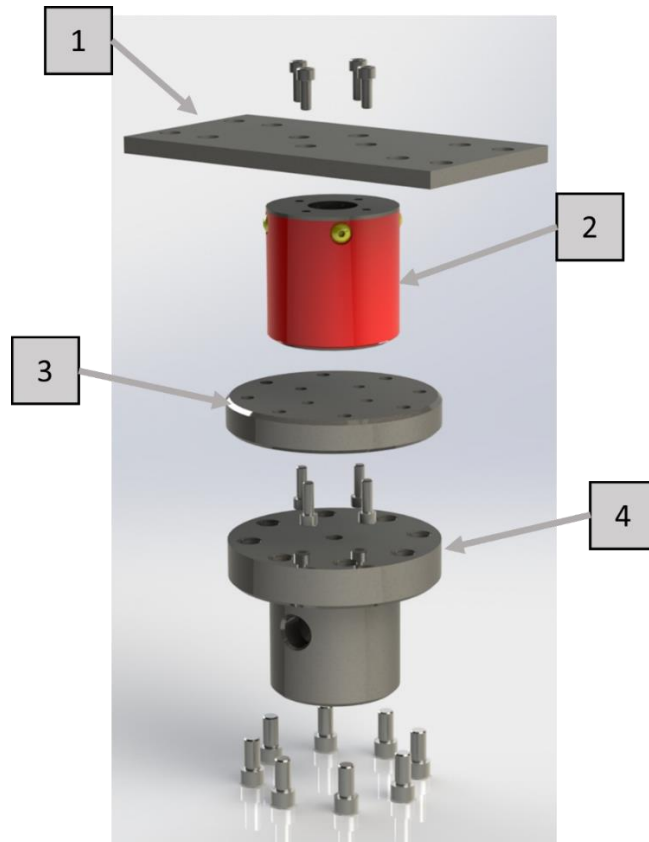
Solidworks exploded view of mounting method for the torsional load cell. 1) Adaption plate for load cell to 80/20 profile, 2) Futek TFF400 series load cell, 3) Adaption plate for load cell to BMEL female mounting fixture 4) Pre-existing BMEL female mounting fixture
